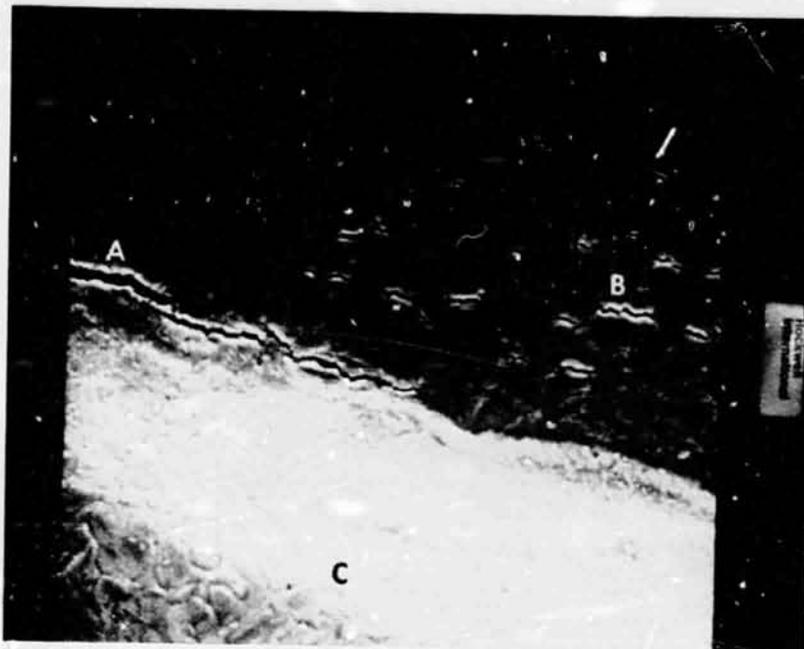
SEM Picture Showing: A) The Main Crack, B) Secondary Cracks, C) The Weld Bead
